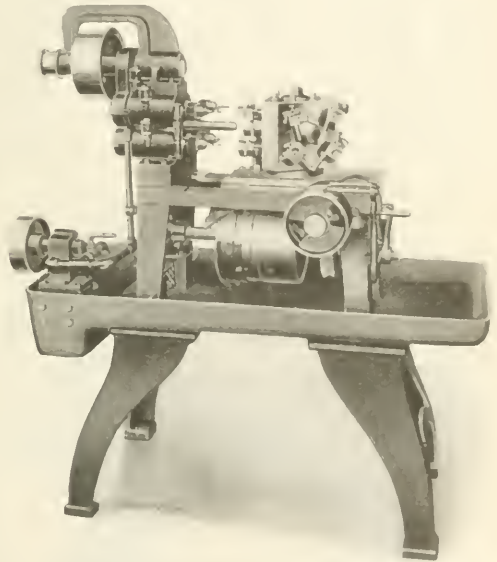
National-Acme No. 4 Four-spindle Drilling Machine
